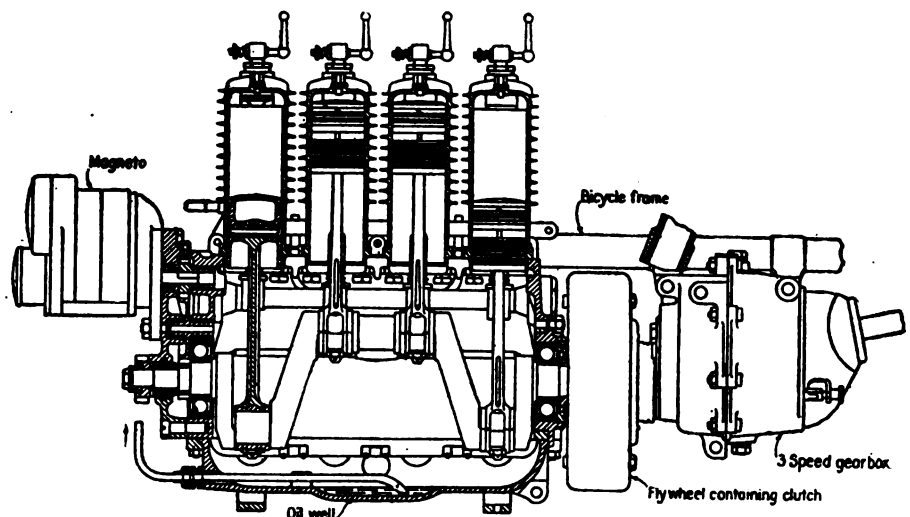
Section of F N four-cylinder engine, with two-bearing crankshaft
